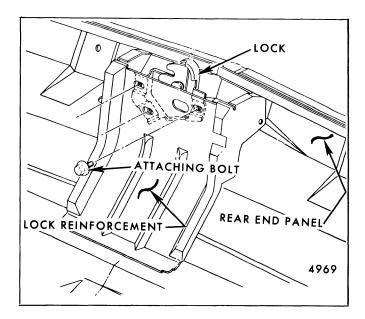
Typical Rear Compartment Lock Mounted in Rear End Panel
